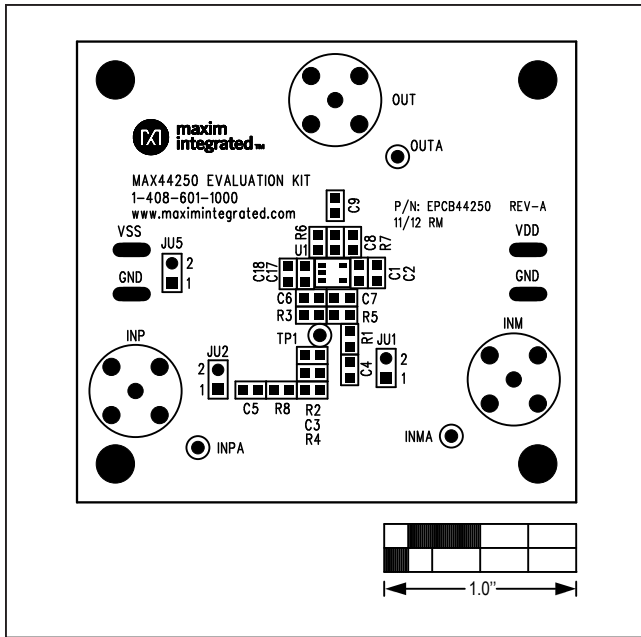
MAX44250 EV Kit Component Placement Guide—Component Side
